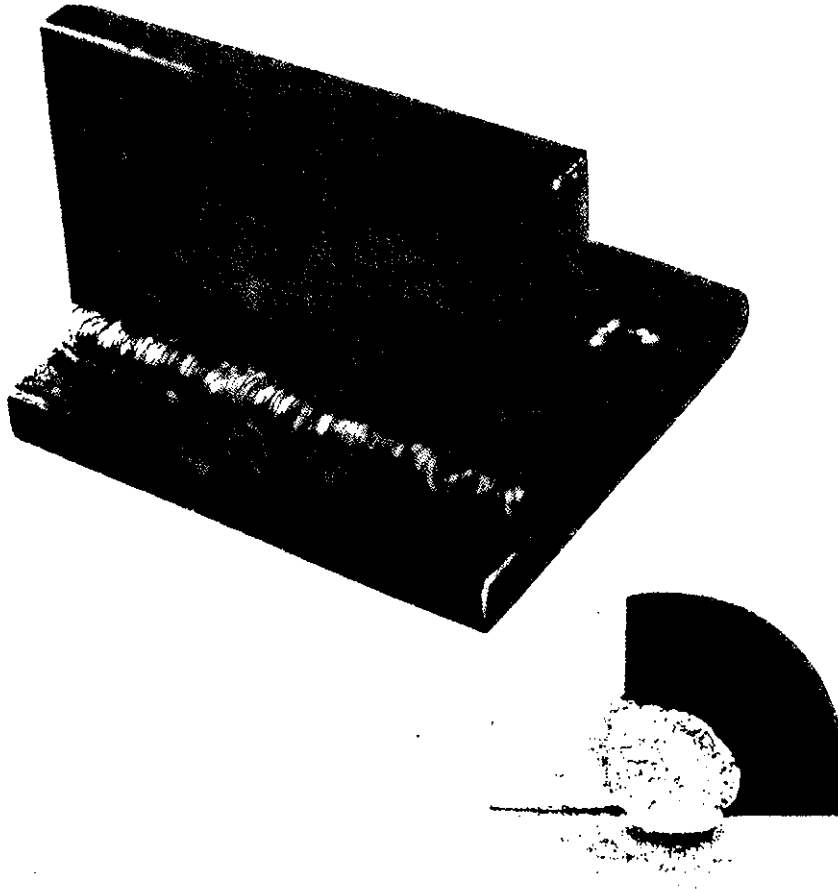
Single Pass Horizontal Fillet Weld
